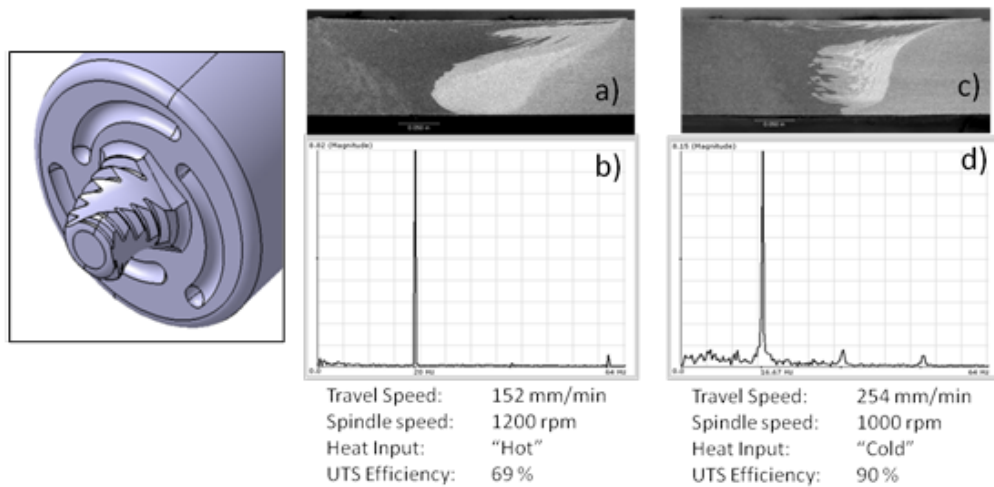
Initial weld tool with RH threads and RH twisted flats, and transverse cross-section macrographs and corresponding e-NDE maps for two coupon-level FSW joints between 3.5-mm (0.138 in.)-thick AA6082-T6 and AA6063-T6: (a) and (b) “hot” weld; (c) and (d) “cold” weld.
